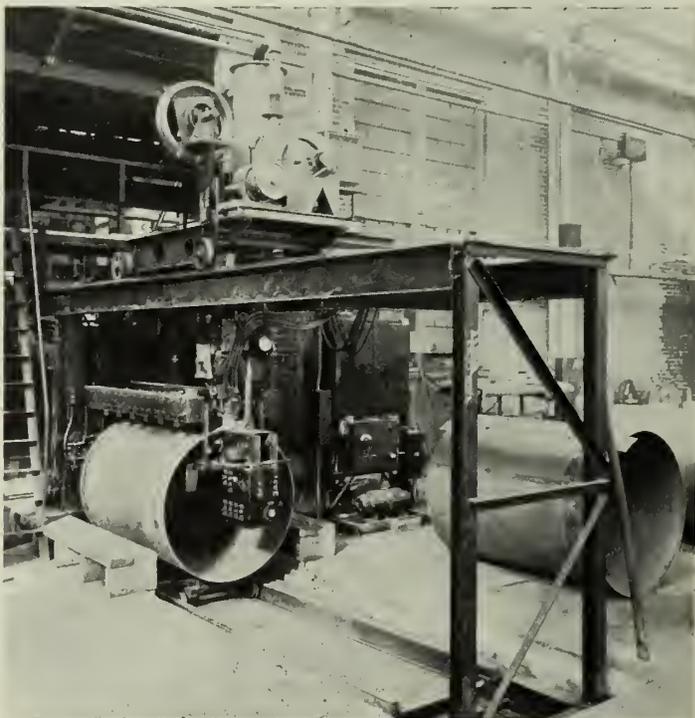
Welding Fixture for Longitudinal Seam.
